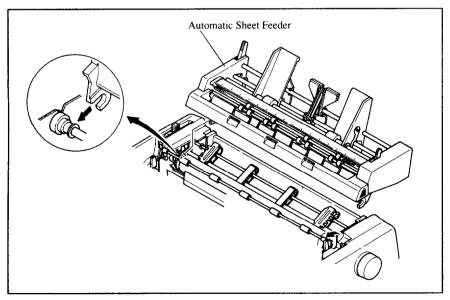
Mount the Automatic Sheet Feeder to the printer.
